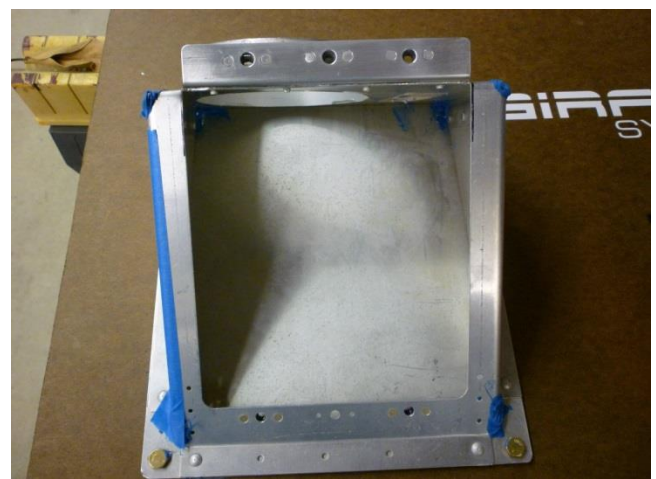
Shows the original top mounting lip removed and the new mounting flange, with nut plates installed, riveted to the top of the original air box.
